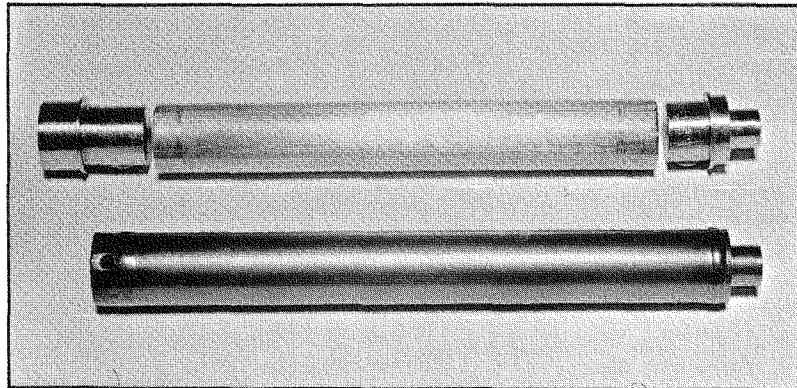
Swaged element of  $\text{UO}_2$  in Zircaloy before installing final welded end plugs, and a similar element after welding and autoclave testing
